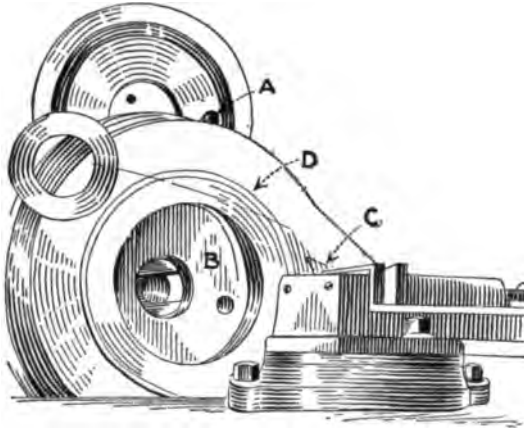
A LATHE JOB ON A MILLING MACHINE
